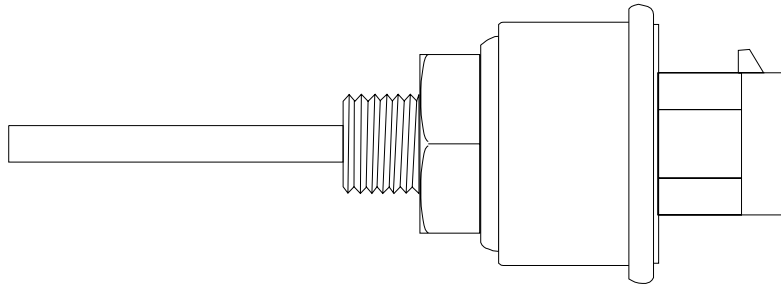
4 Pin RobertShaw (RS-805B) 85927-C1 Coolant Level Sensor
